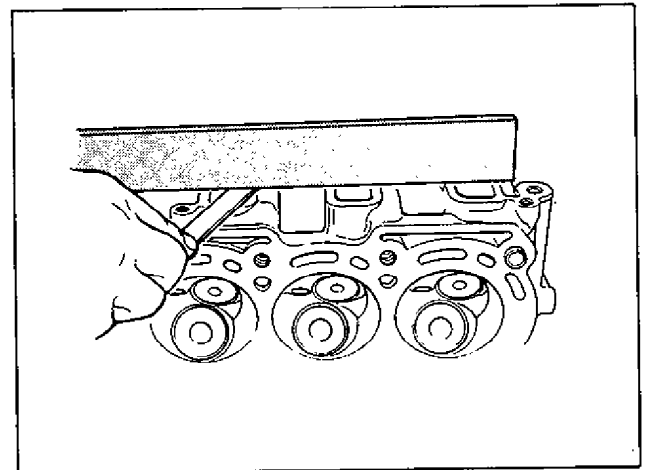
A-92 Measuring Surface of Exhaust Manifold Seating Face
